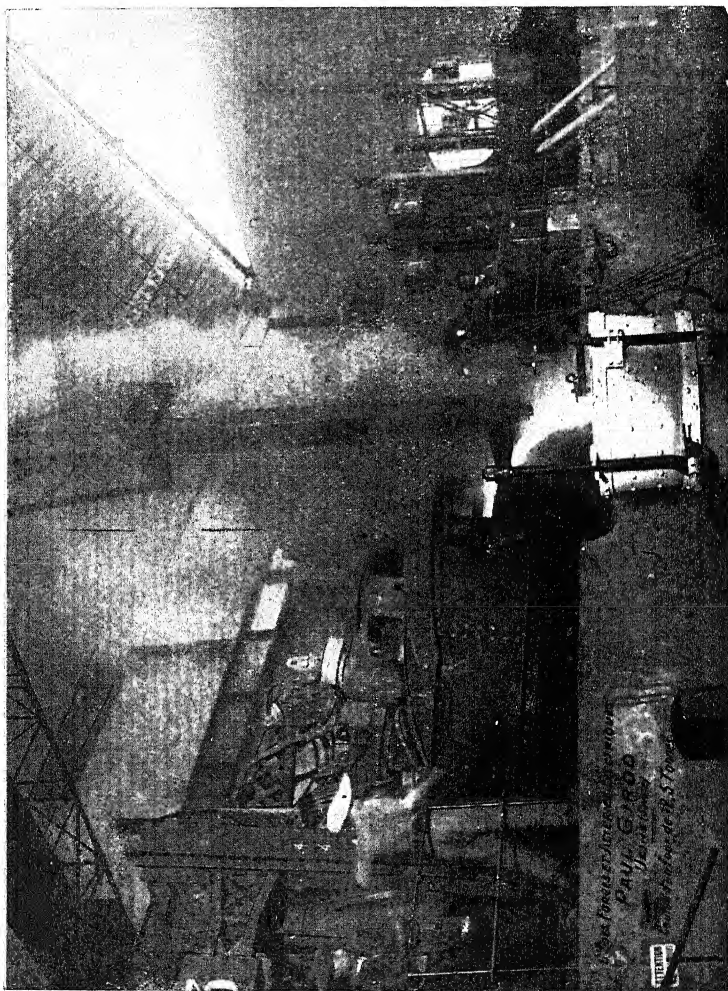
12.5-TON FURNACE AT UGINE. FINISH.
